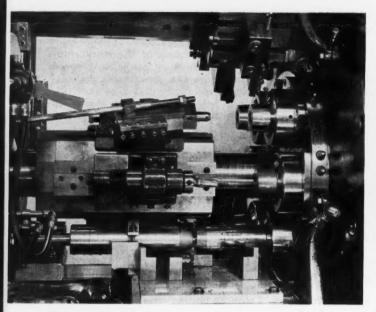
Under Current Fixture Mounted of End - Working To Slide
